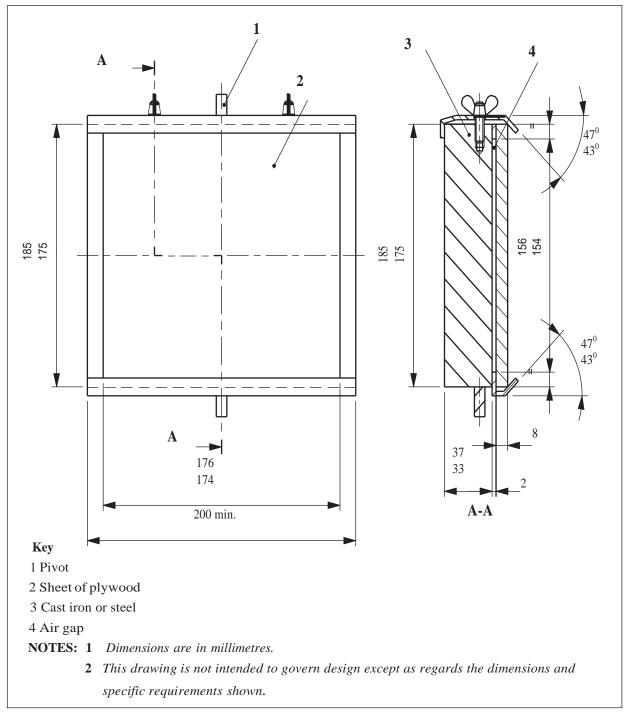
Pendulum impact test: Constructional details of mounting support for test samples (see 19)
